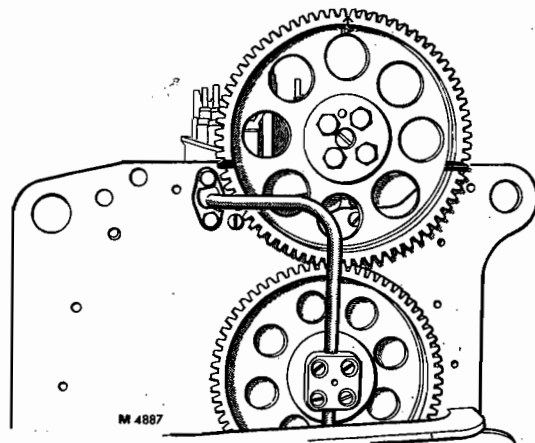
CAMSHAFT GEAR TIMING MARKS
